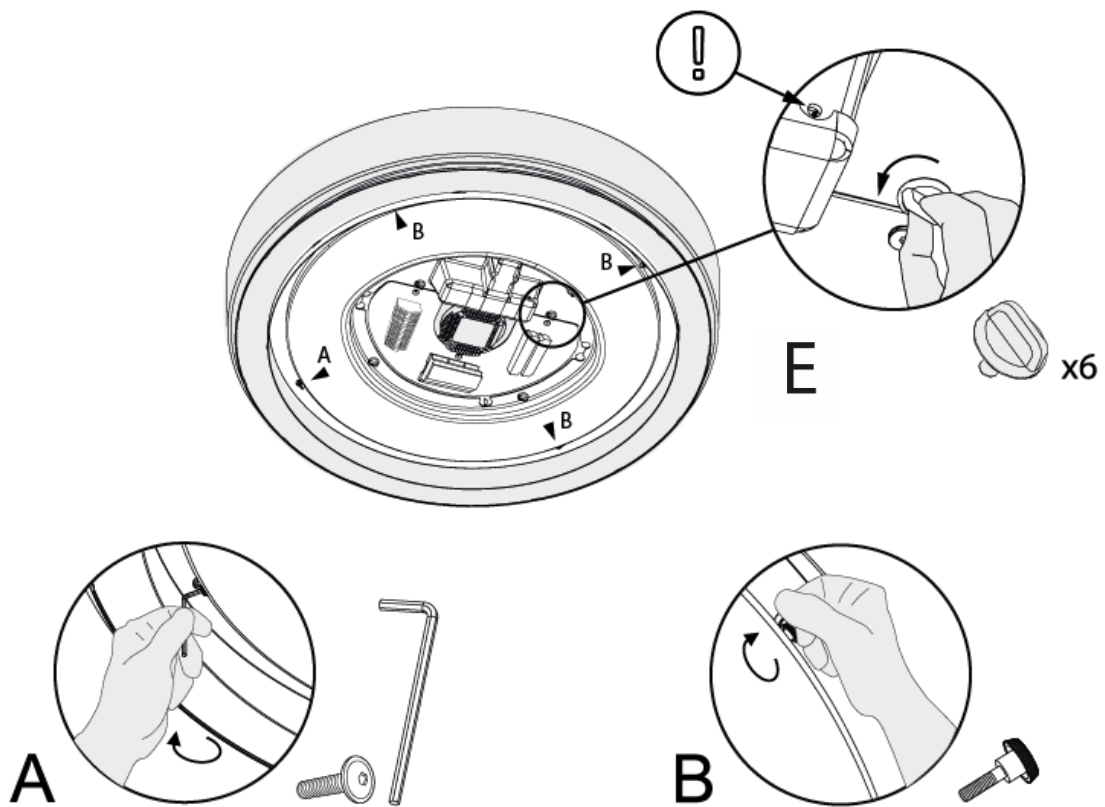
DISASSEMBLING THE CONDENSATE TRAY
